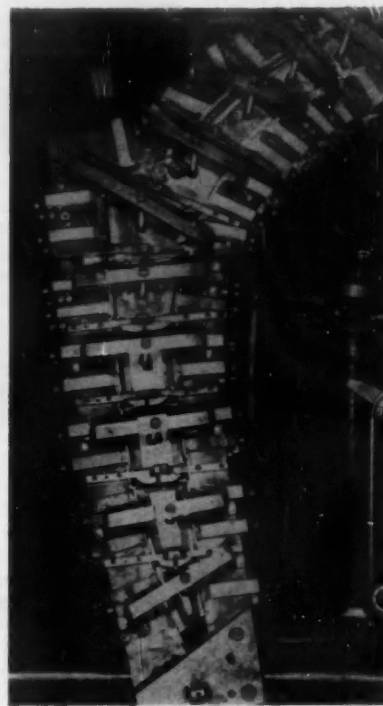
This welding and heat treating fixture proved to be a significant "state-of-the-art" development in high temperature load carrying structure fabrication.
